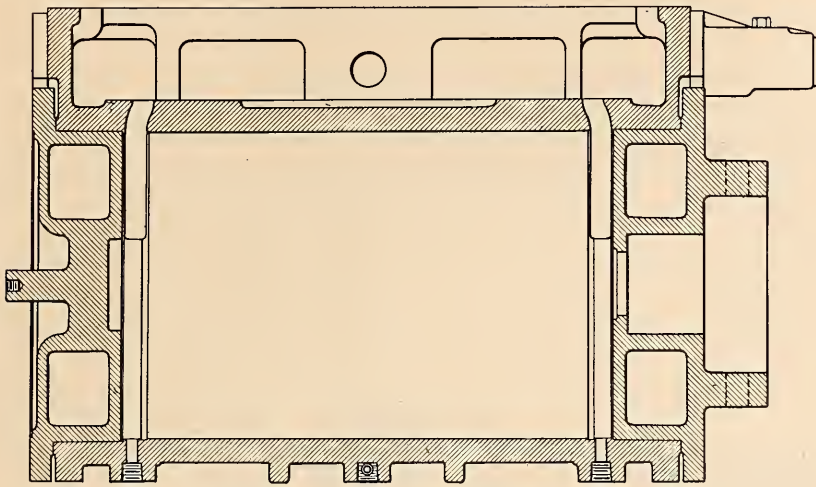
CYLINDER HAVING SHORT PORTS, USED WITH ALLFREE-HUBBELL VALVE GEAR.
